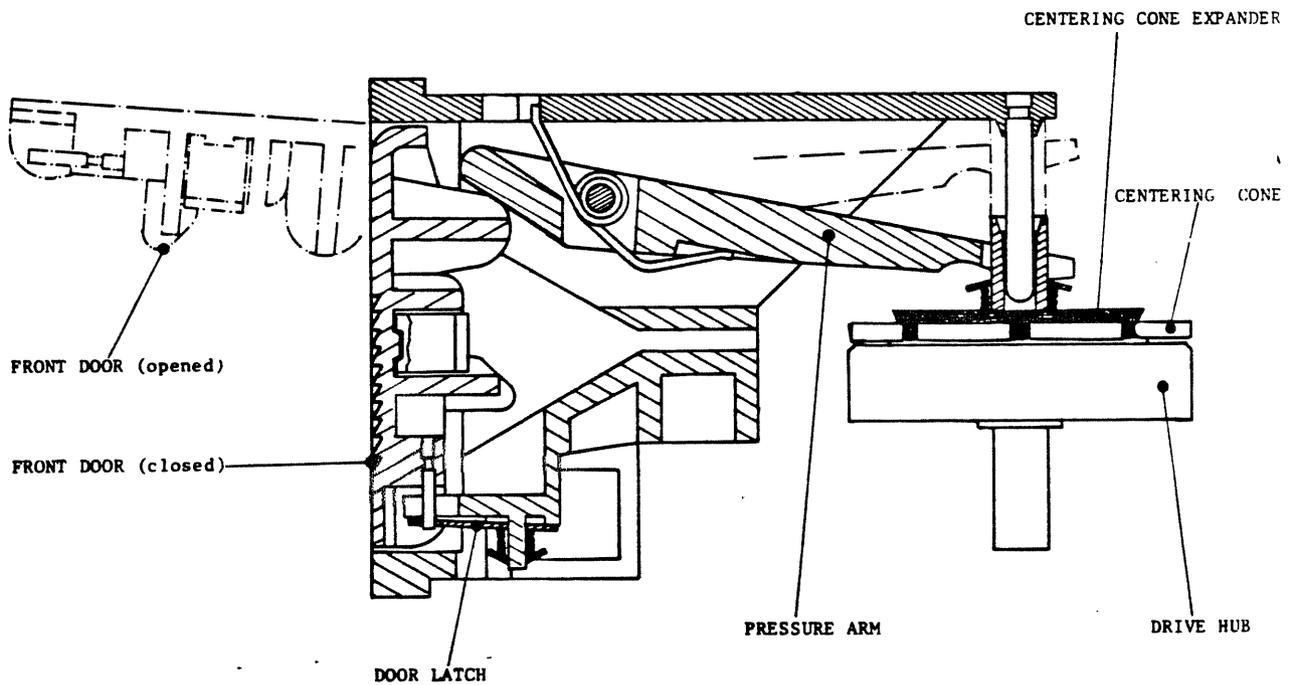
3 . SPINDLE AND FRONT DOOR MECHANISM
